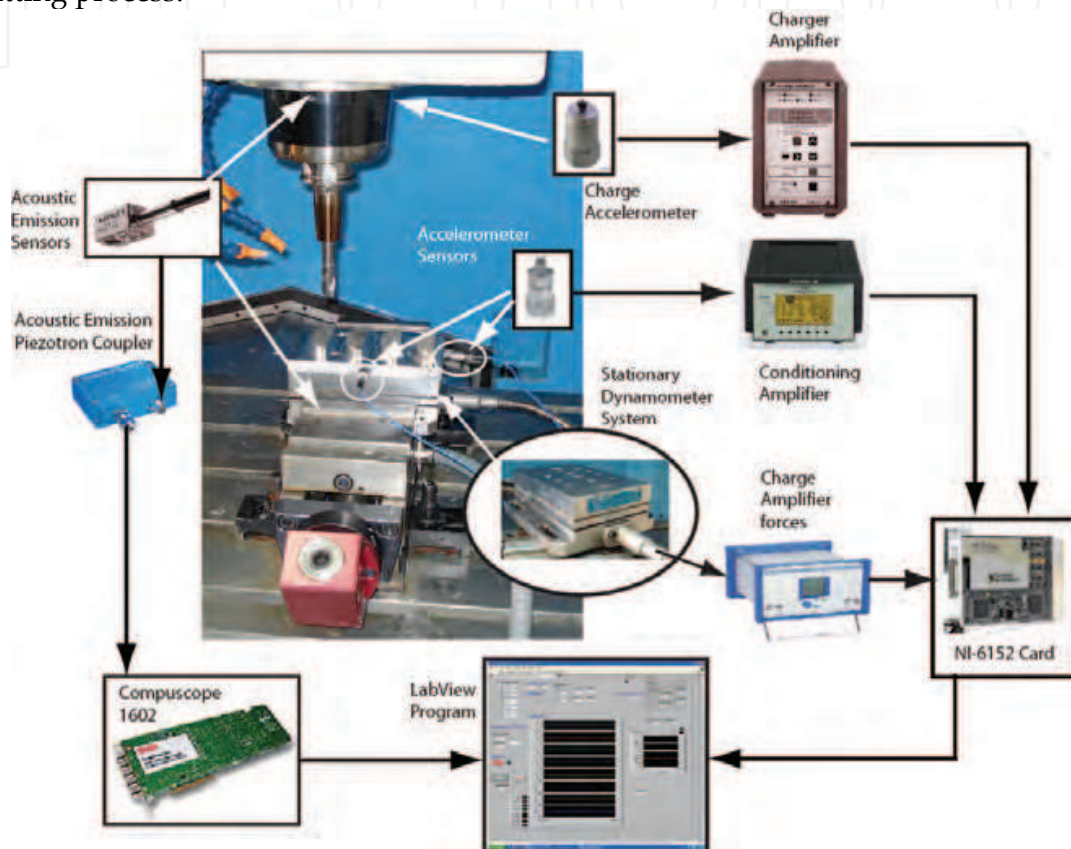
Experimental Set-up. CNC machining centre and data acquisition system (sensors, amplifiers, boards and LabView interface). The vibration signals of the spindle and workpiece, and forces during machining process were acquired with the NI-6152 board. The acoustic emission signals were acquired with 1602 CompuScope board.
